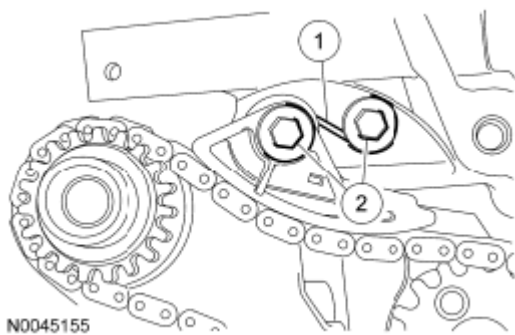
Identifying Tensioner Spring & Shoulder Bolts
